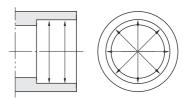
Measuring Positions of Housing Bore Diameter
